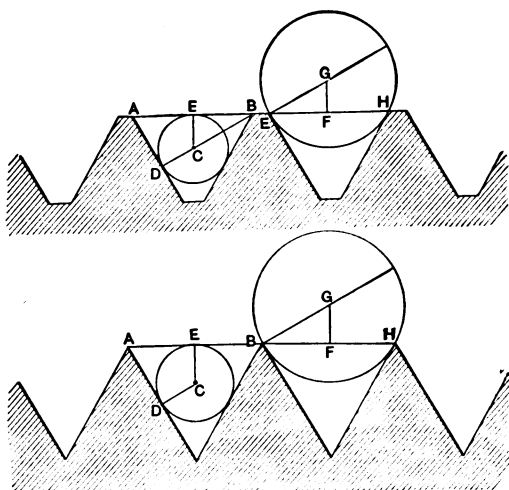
Limits for Wires Used when Measuring Threads by the Three-Wire System
